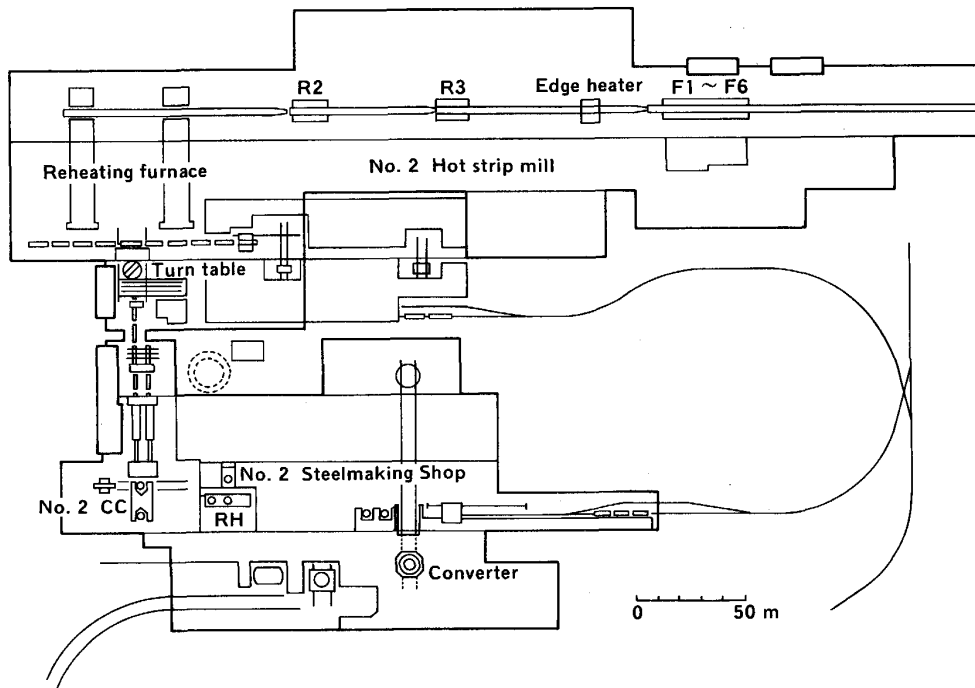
Layout of No. 2 Steelmaking shop and No. 2 Hot strip mill.
